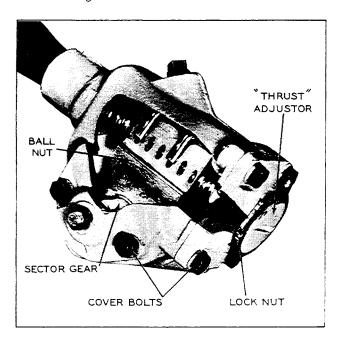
Steering Gear Thrust Adjustment (Worm Bearings)
